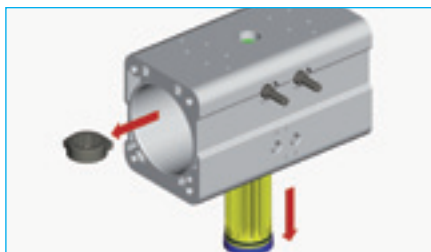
| Disassembly of the drive pinion actubar® Type AD/AS-004 to AD/AS-230
